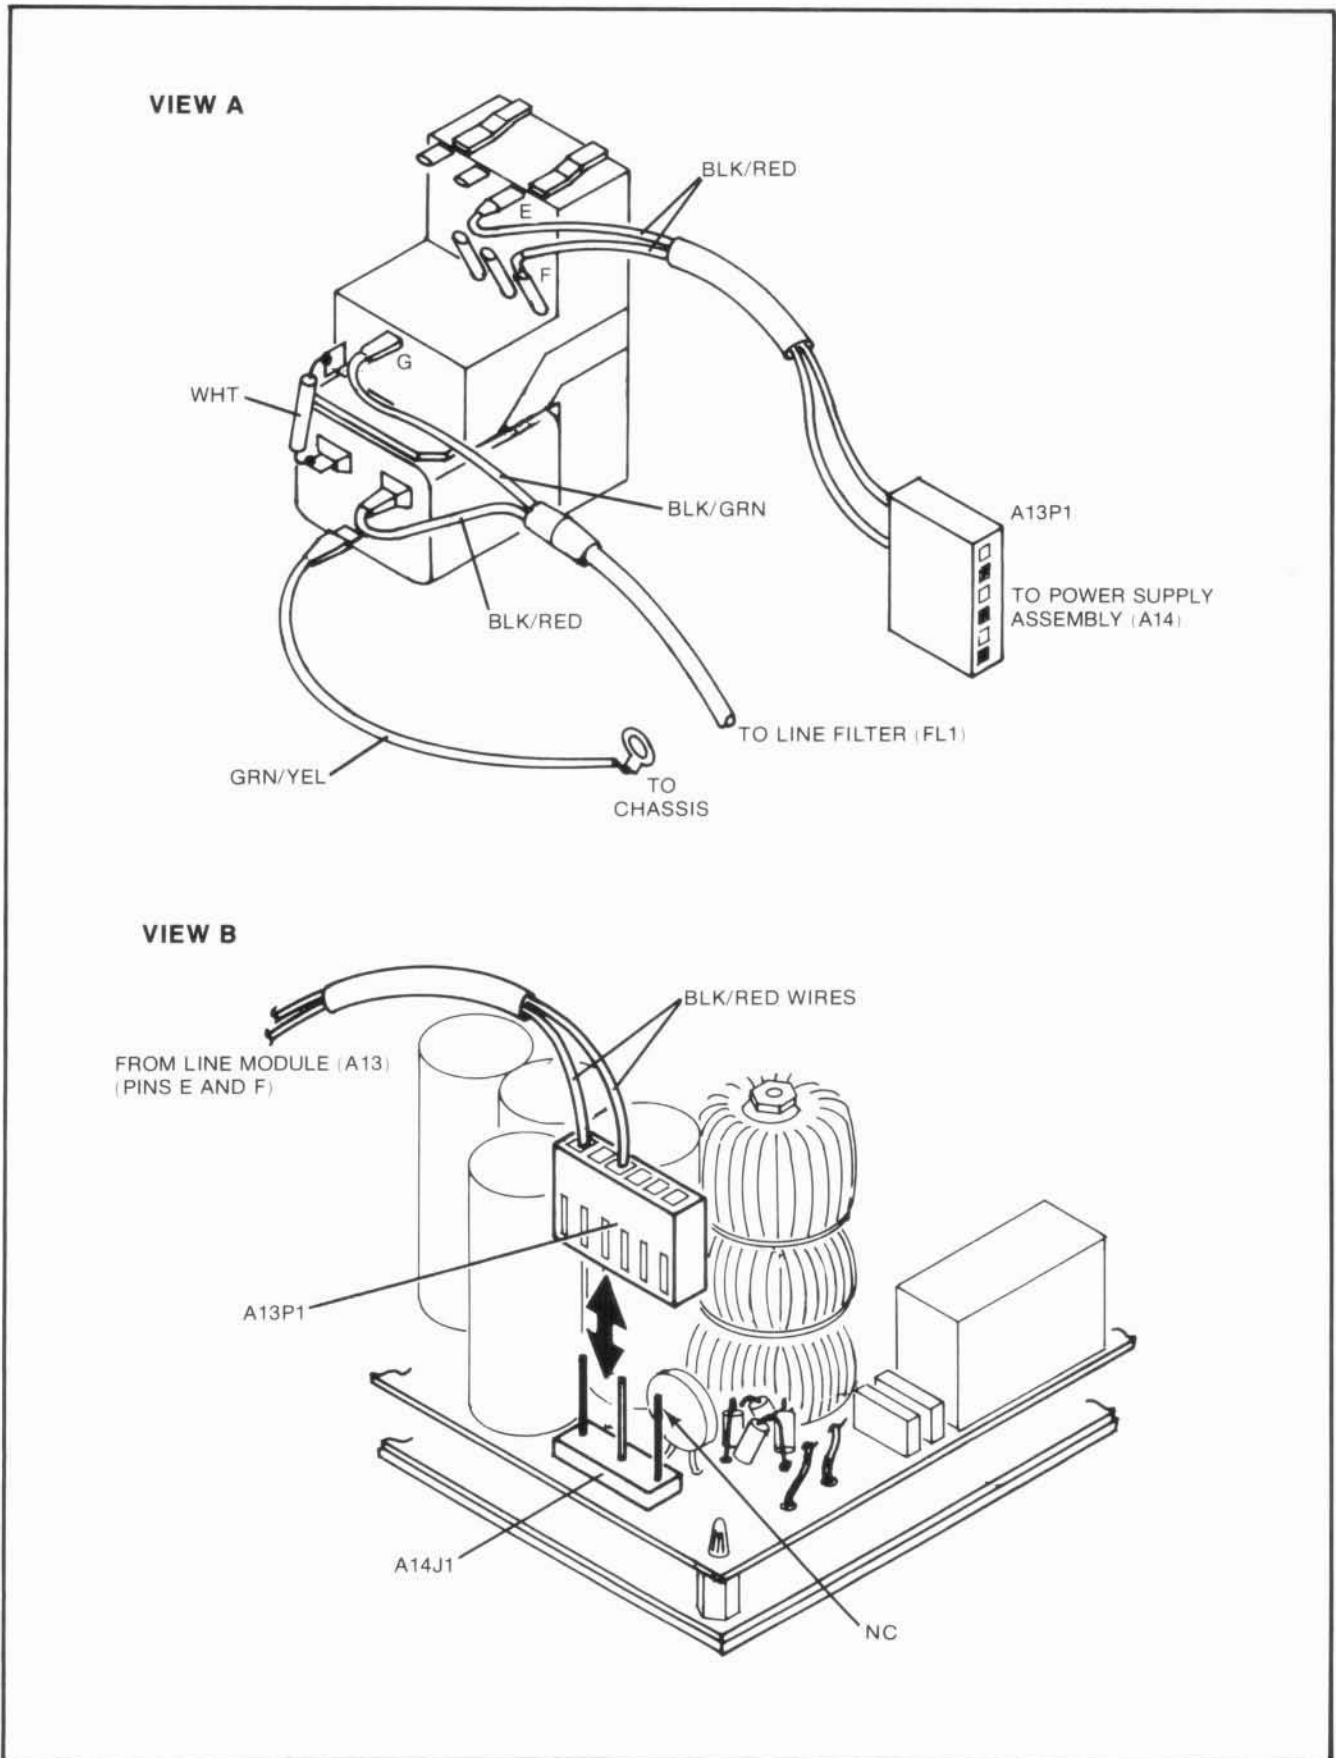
A13 Power Line Module Cable (View A) and A14 Power Supply (View B) Assembly Removal/Installation
